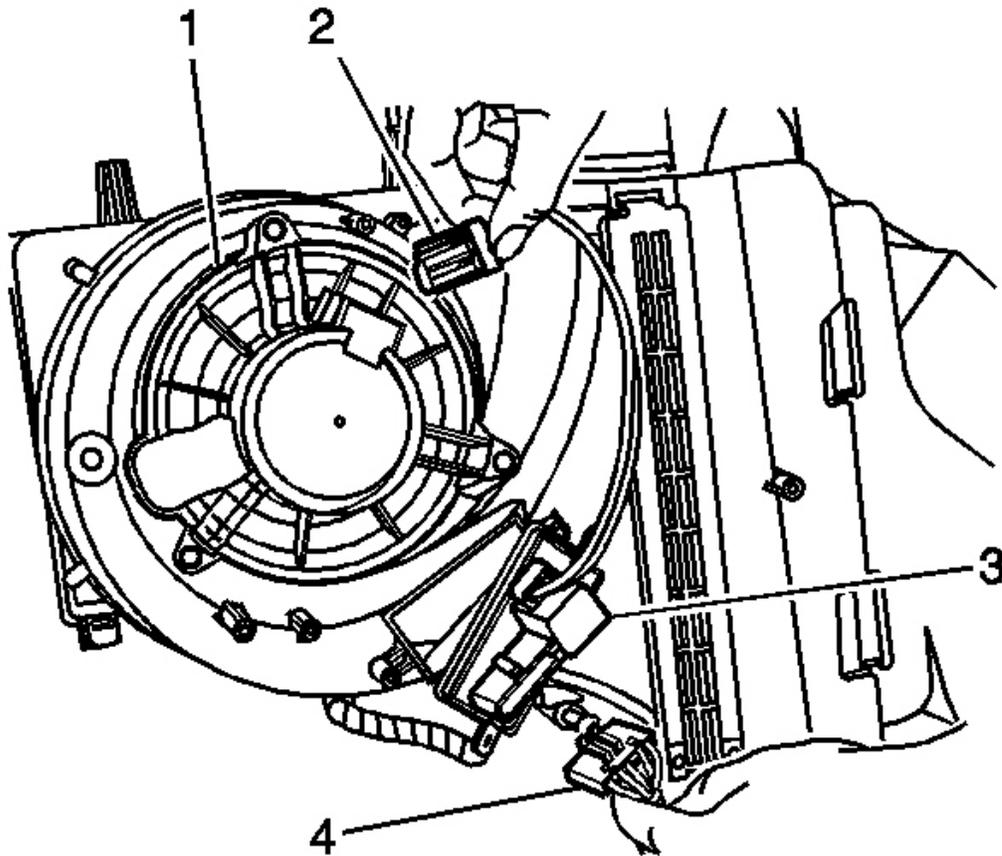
Blower Motor Control Processor & HVAC Module Assembly
